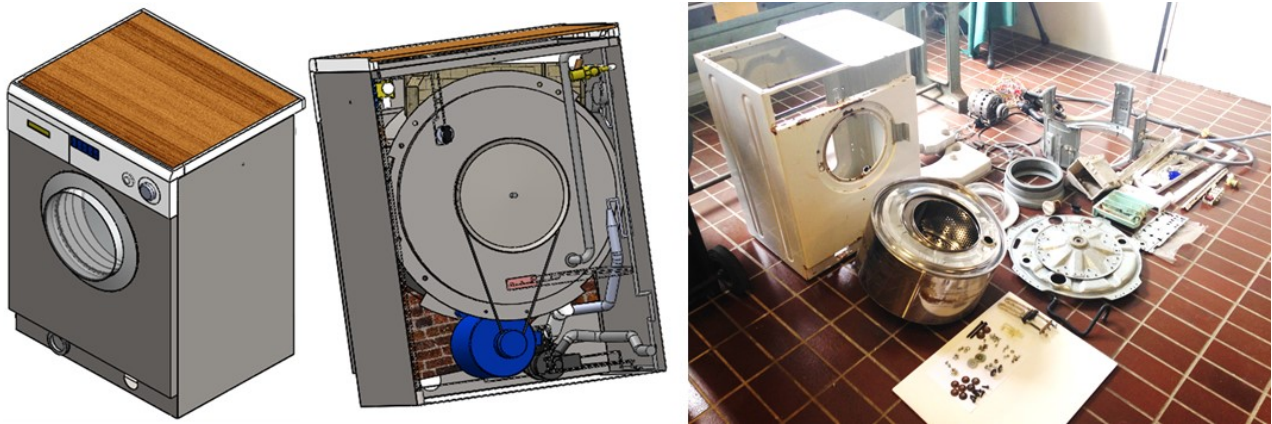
washing machine 3D model (left) and real disassembled product (right).
